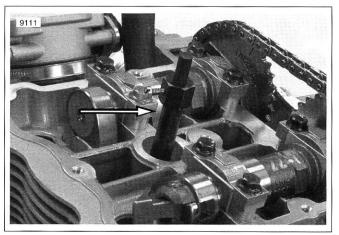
Top Dead Center Positioning Tool (HD-45653)
